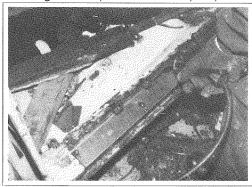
Trim the inner edge of the tread plate to match the floor edge and tack...
